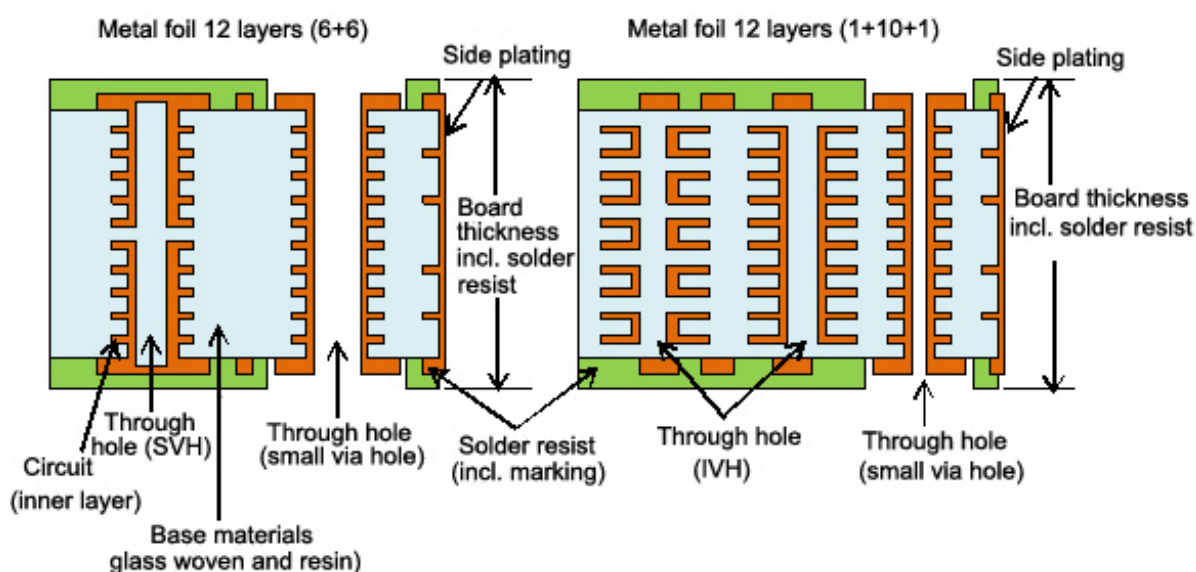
Cross Sectional View of Metal Foil Printed Wiring Boards
